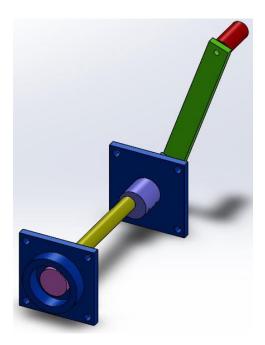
Solidworks Model of the Handle and Eccentric Shaft Subsystem
